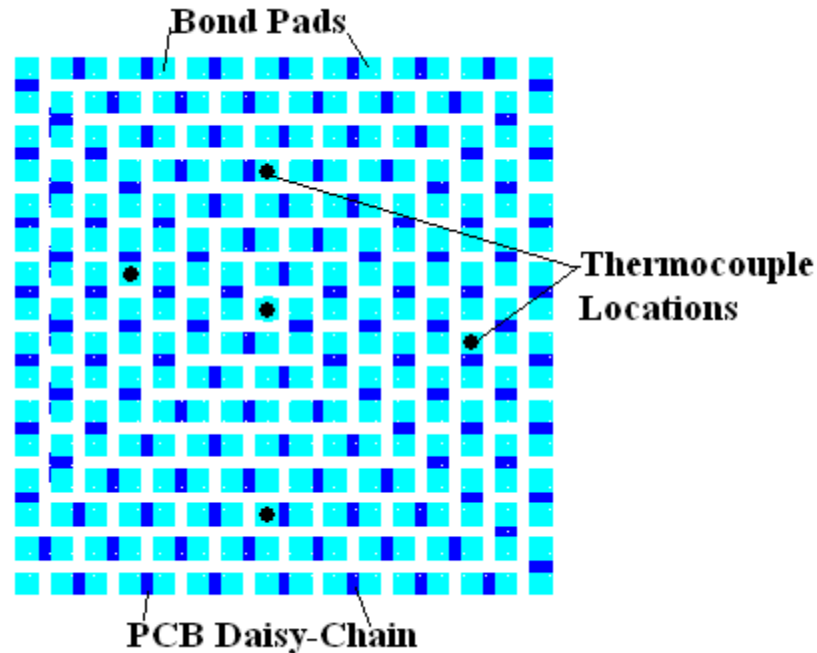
The five thermocouple locations on the bond pads of the PCB which was embedded into the solder balls during the reflow process.
